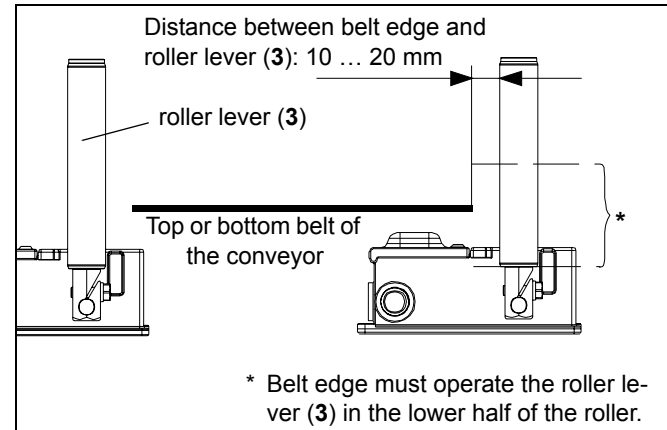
Mounting the misalignment switch on the conveyor belt in pairs
